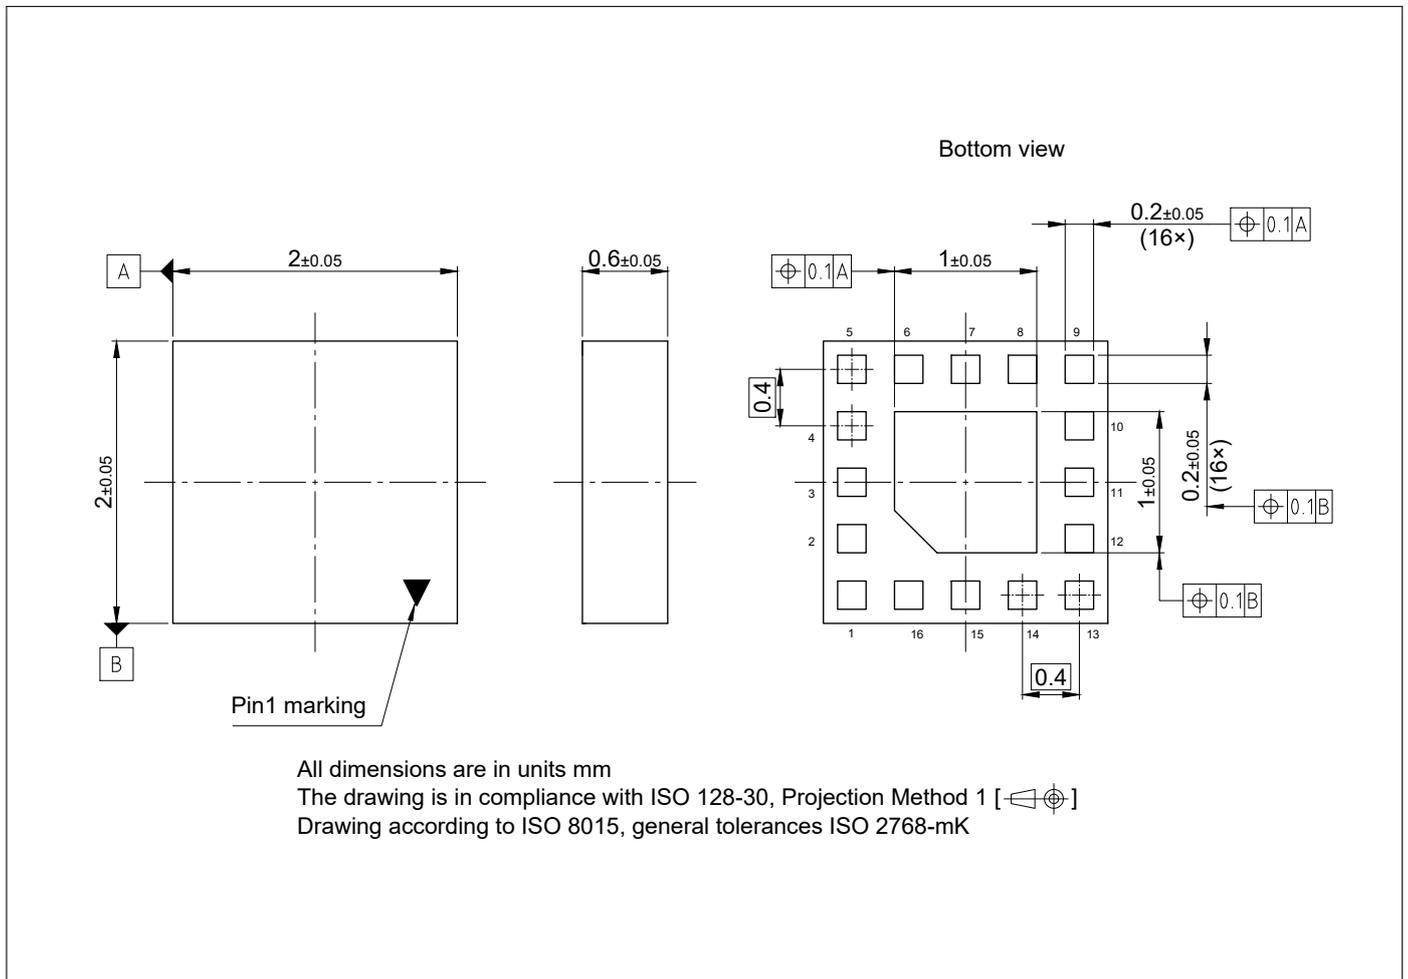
PG-ULGA-16-6 package outline drawing (top, side and bottom views)
